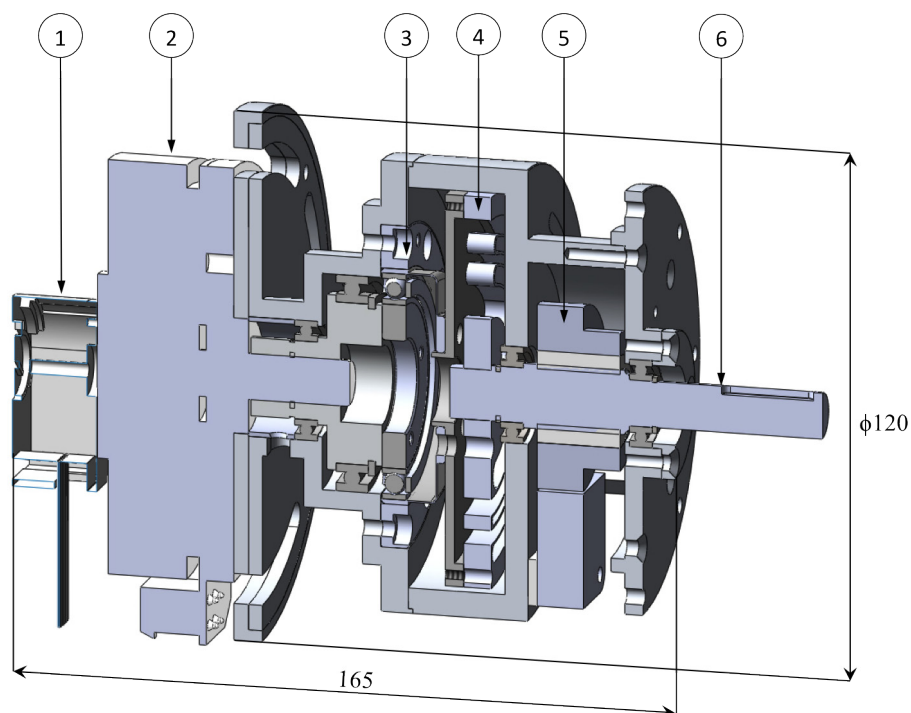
Cross section of rotary SEA 90W. 1: optical incremental encoder, 2: flat DC motor, 3: Harmonic Drive, 4: custom torsional spring, 5: magnetic incremental encoder, 6: output shaft. Dimensions: 120 mm (diameter) \times 165 mm (axial length). Total mass is 1.8 kg.
